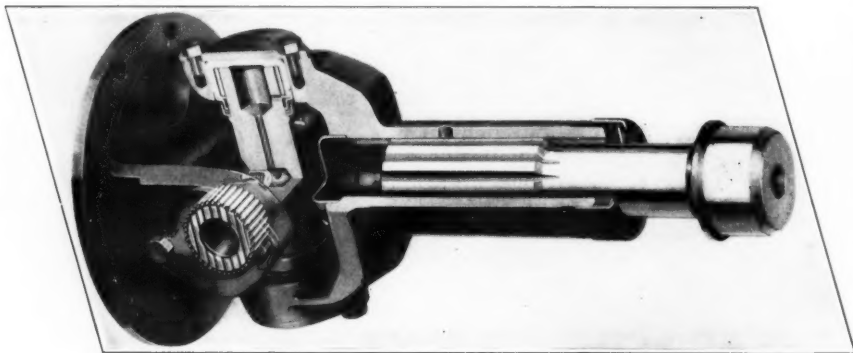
Cutaway view of new needle bearing universal joint. An oil type of lubricant is introduced through fitting in center spider.
